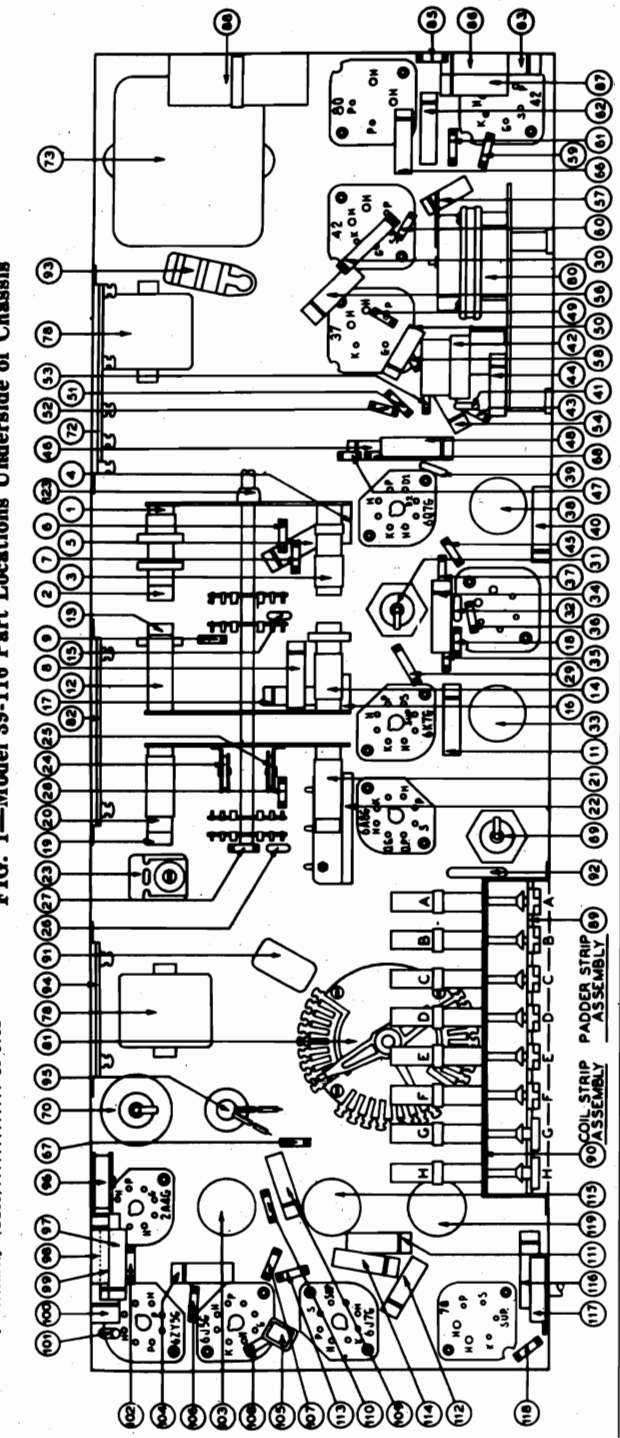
Model 39-116 Part Locations Underside of Chassis
